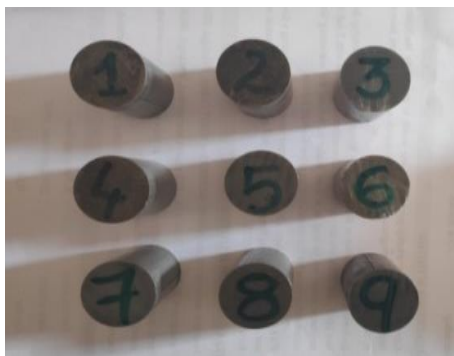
(b) SS AISI 316 work piece after machining on wire-EDM
